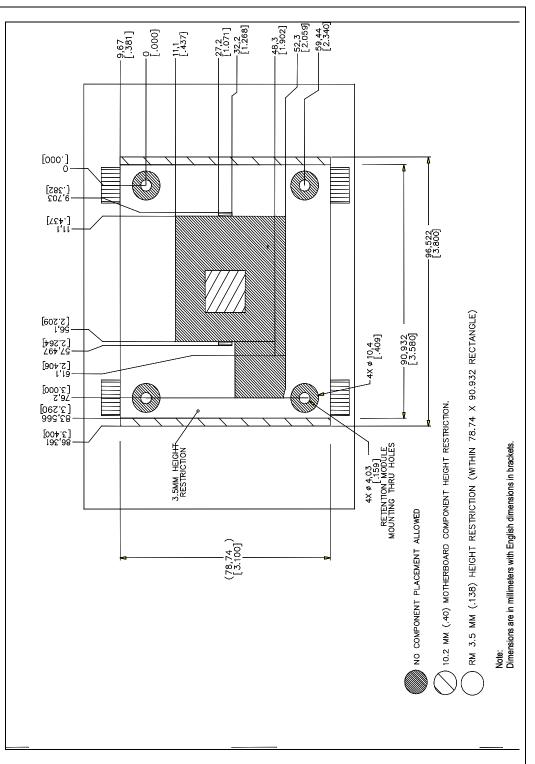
Retention Mechanism Keep-Out Drawing 2
